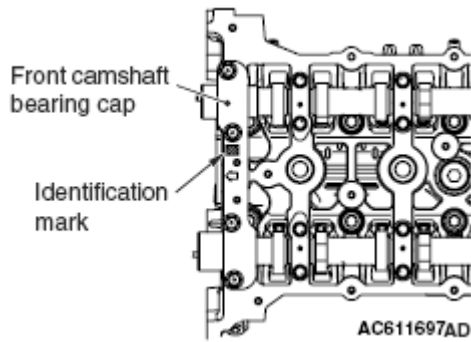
Identifying Front Camshaft Bearing Cap And Identification Mark
